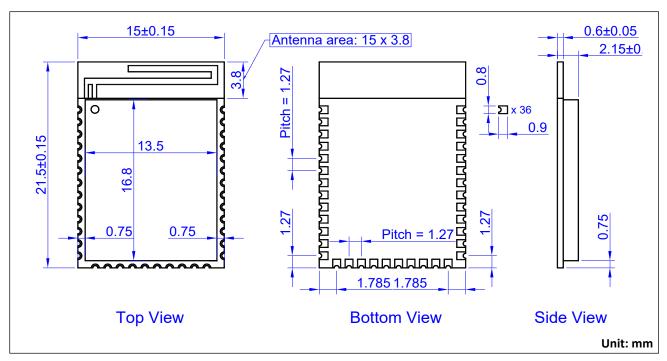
Mechanical Drawing of BDE-MP2652R7A
